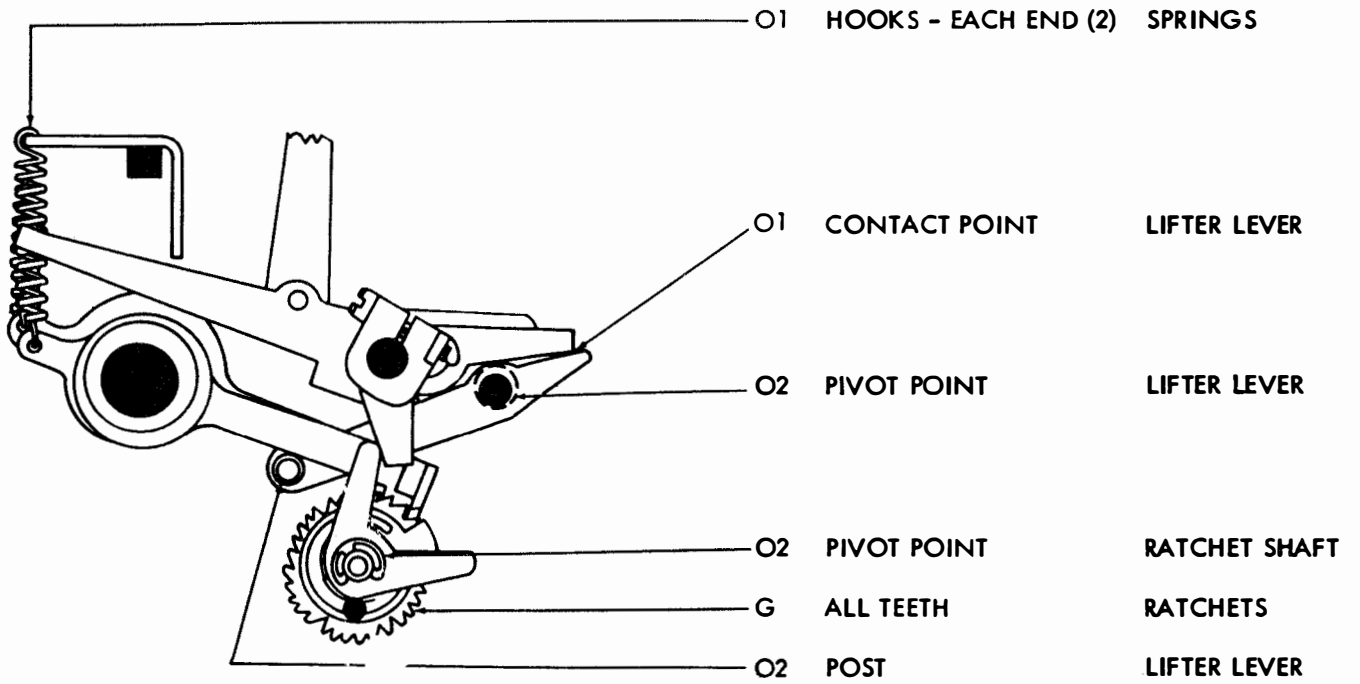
Remote Control Noninterfering BLANK Tape Feed-Out Mechanism (Sheet 3 of 5)
